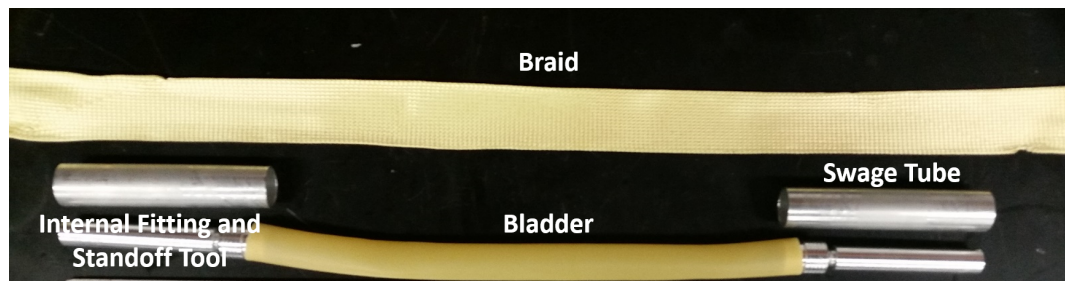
Components of FAM and swage tools prepared prior to assembly
